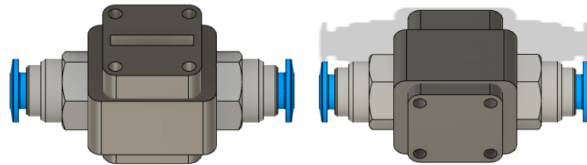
Design of the final chamber for PAL conductivity measurement. Left: chamber top view; Right: bottom view. Dimensions: 24 mm (x), 20 mm (y), 24 mm (z).
